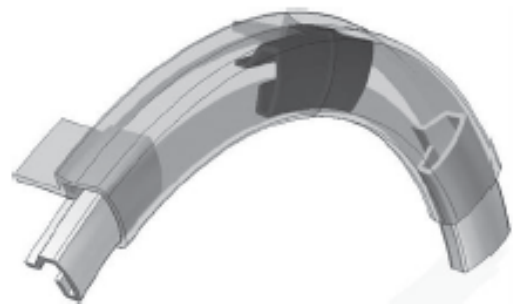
Mounting system of the pushrim segments for assembling with internal parts.
